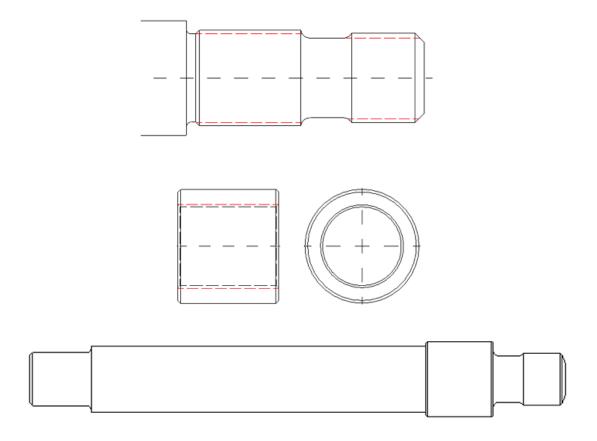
Design of LH Threaded Ring Sucker Rod End on Polished Rod
